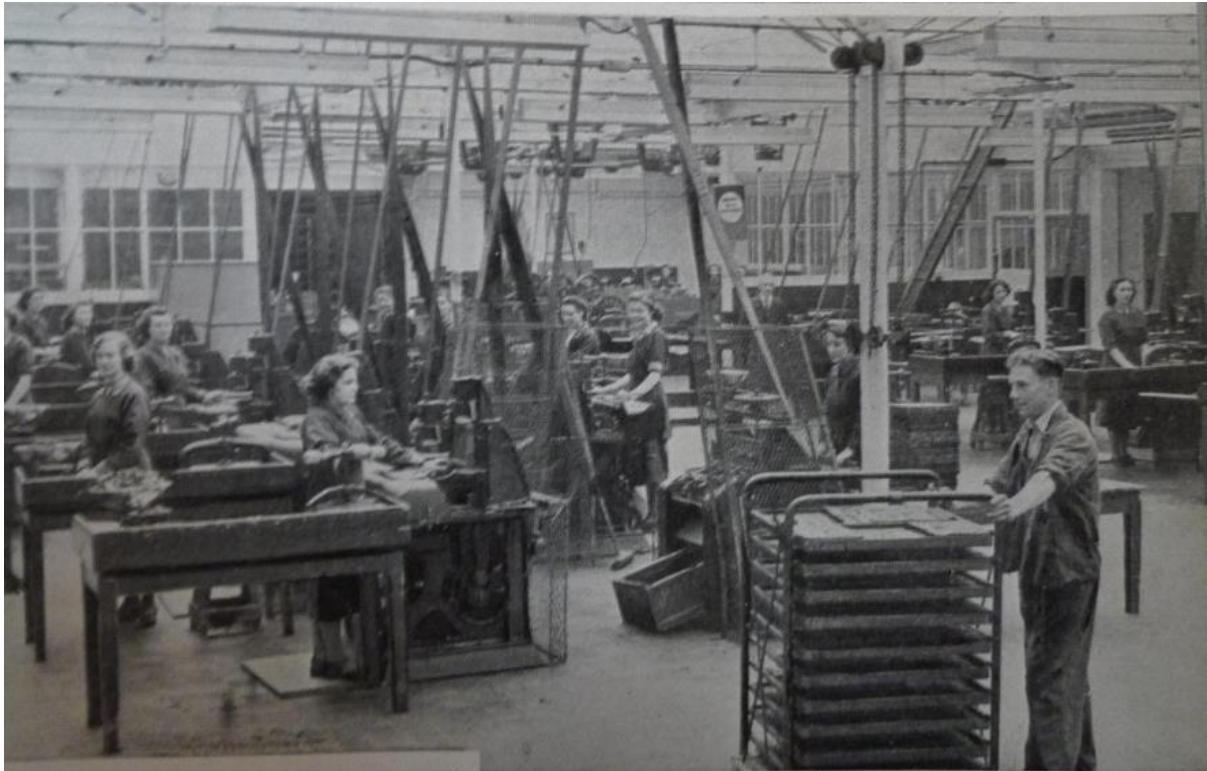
1920s INTERNAL PHOTOGRAPH SHOWING THE MANUFACTURE OF CLARKE'S TOBACCO IN THE SUBJECT BUILDING.
